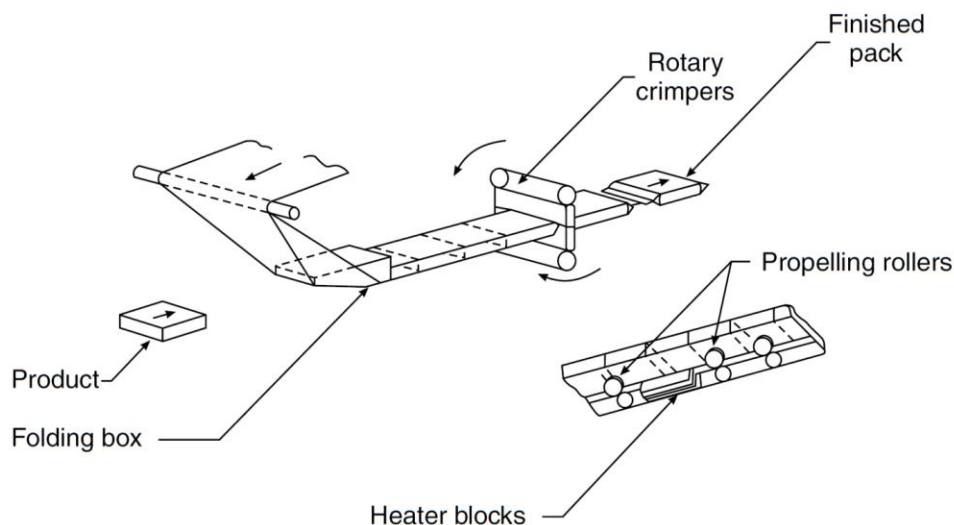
Horizontal form fill seal machine (HFFS) (Coles et al., 2003)
